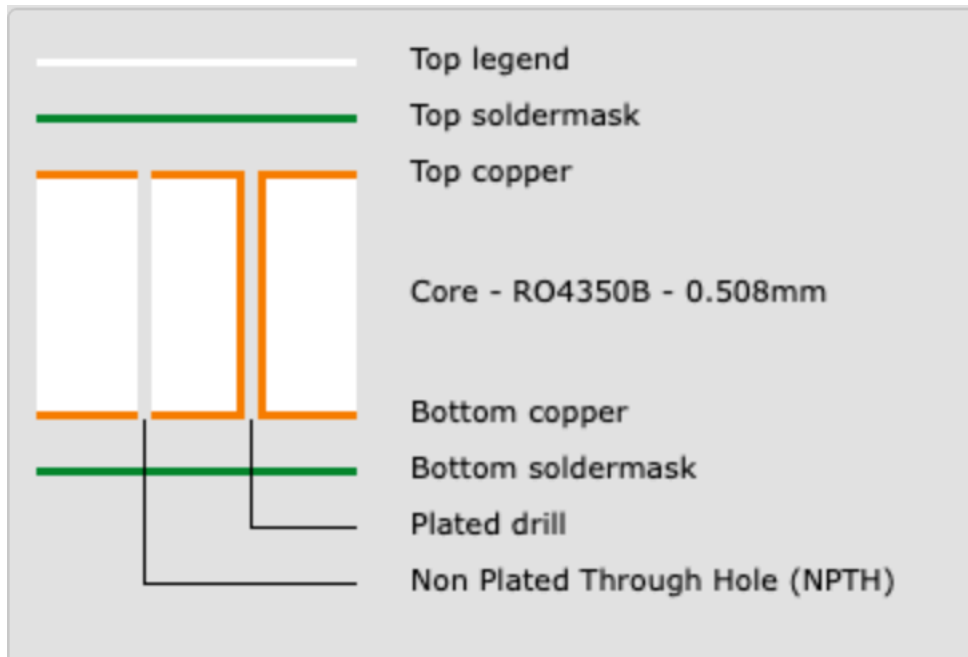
The PCB stack for this competition. Solder mask will not be included.
